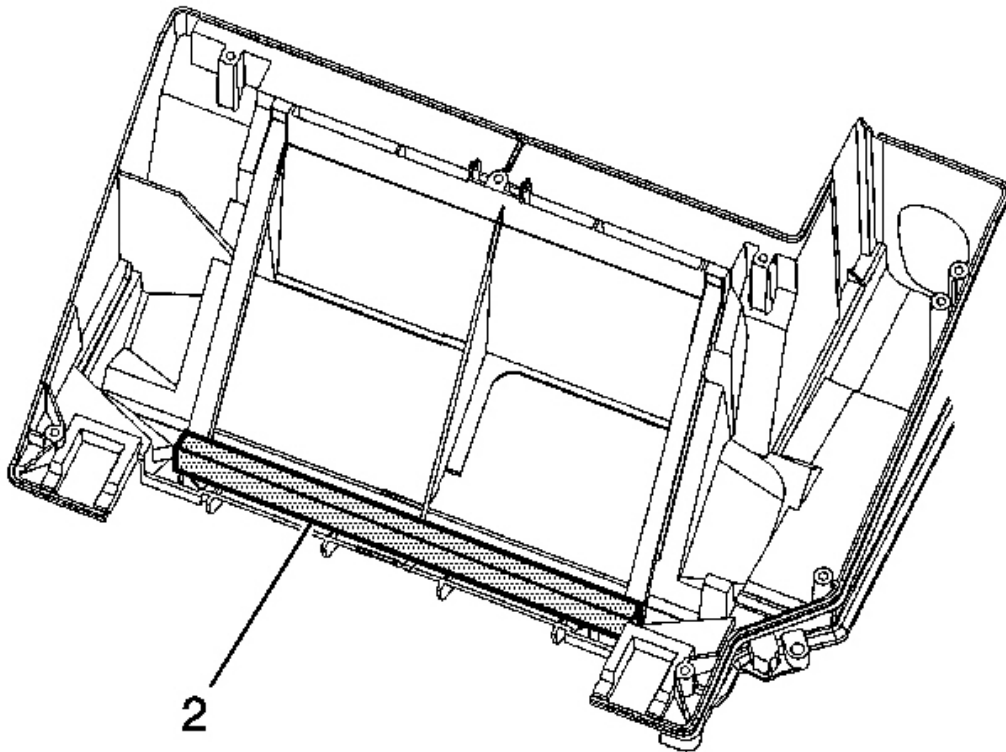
Lower HVAC Module Case & Heater Core Upper Seal
